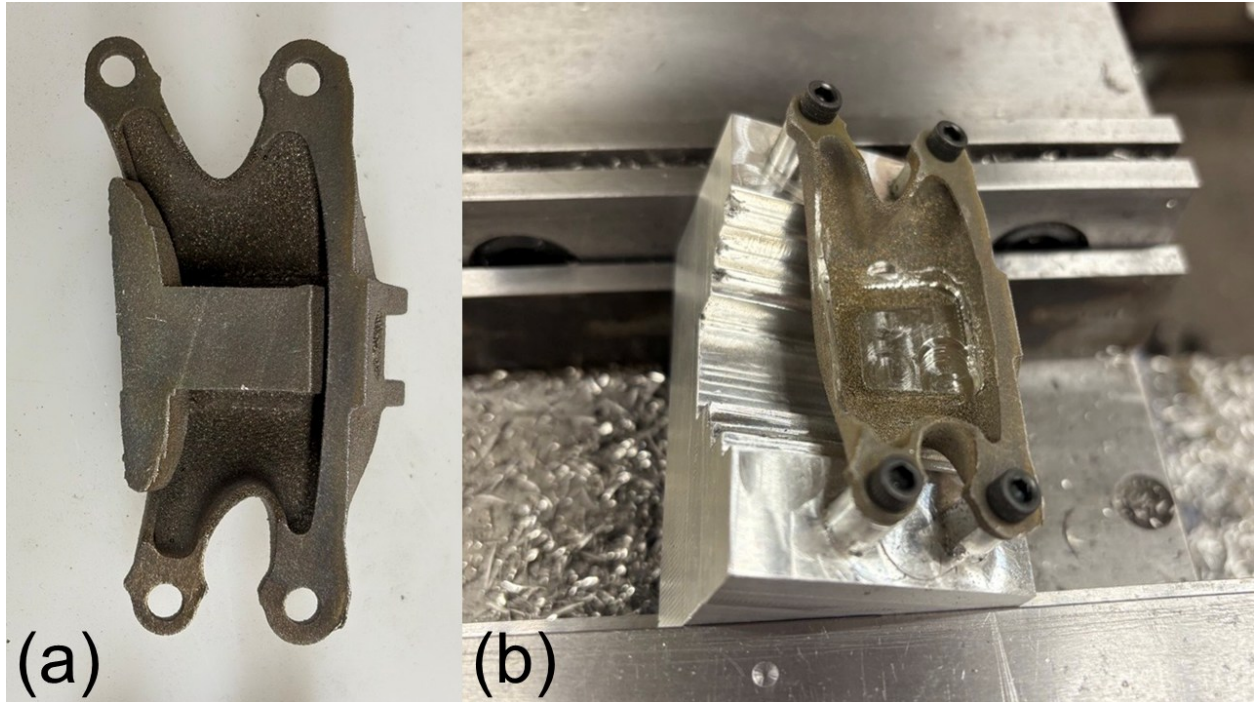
(a) Fully supported bracket after EDM removal. (b) Fully supported bracket with custom tooling and supports machined.
